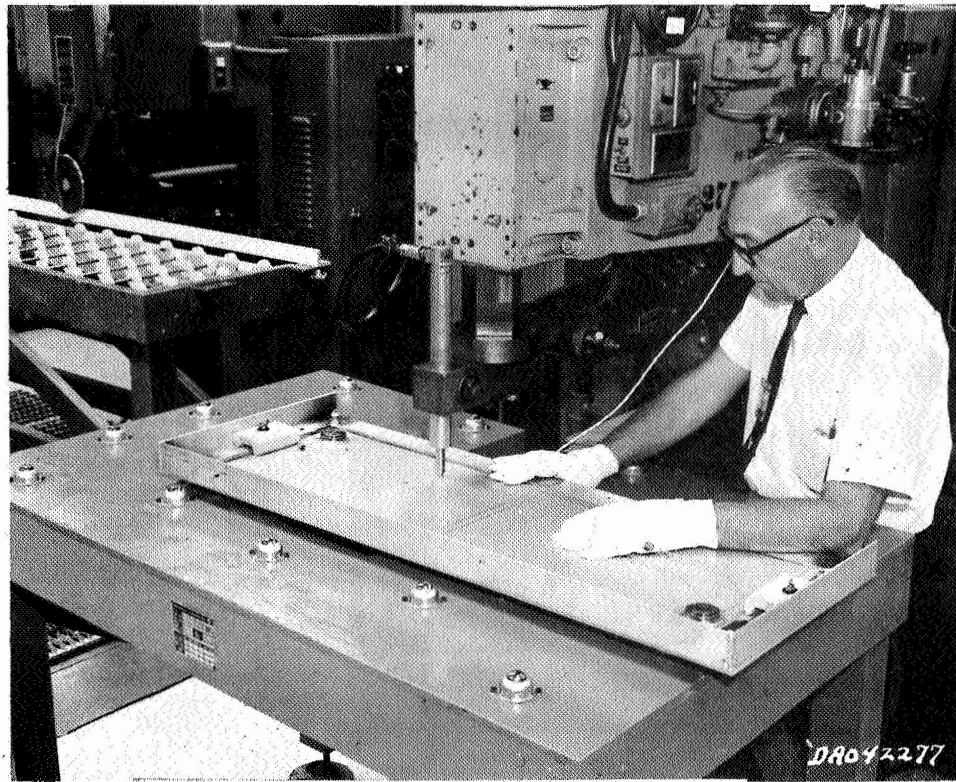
Spot Welding Showing Table and Frame Holding Target Sheets and Vinyl Template
